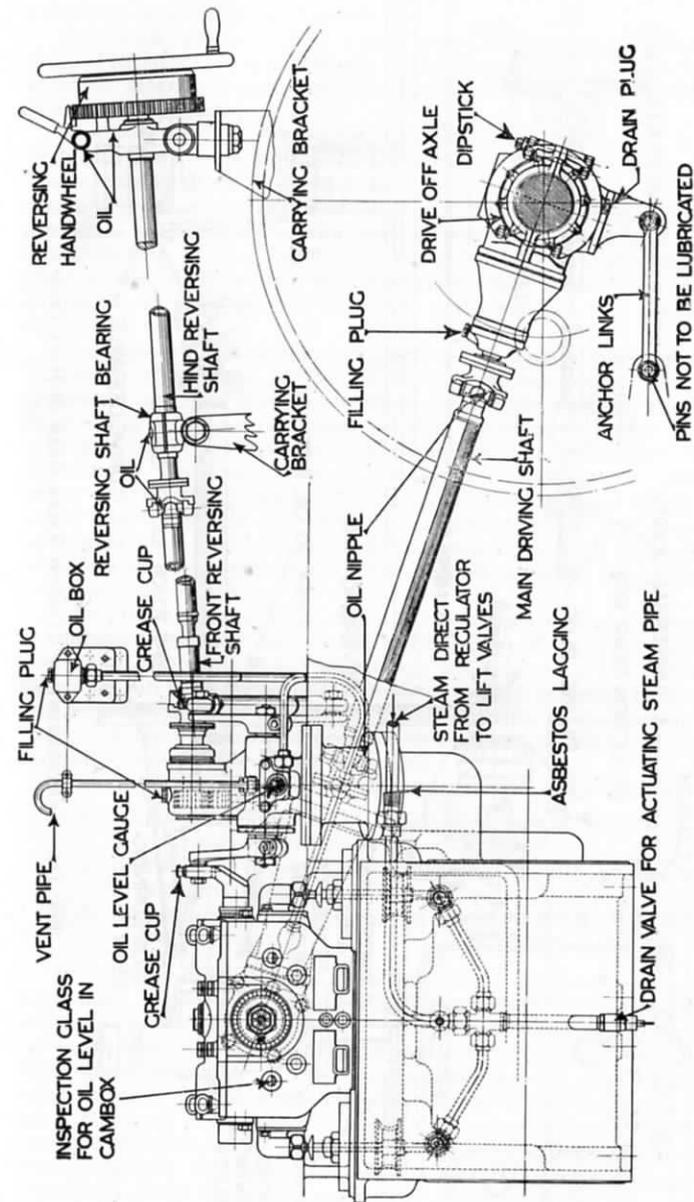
ARRANGEMENT OF CAPROTTI VALVE GEAR IN ELEVATION.
